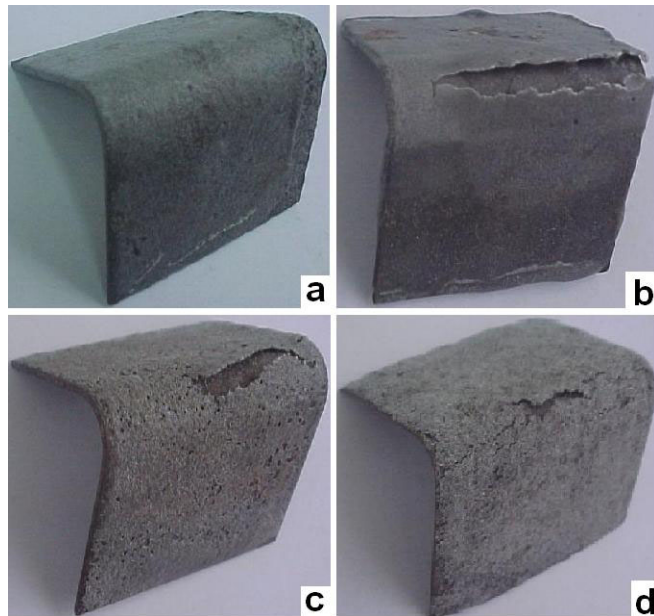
Macro photographs of the flame aided deposited coatings after bend testing: a) 30%Al; b) 30%Al (higher thickness); c) 50%Al; d) 70%Al;
